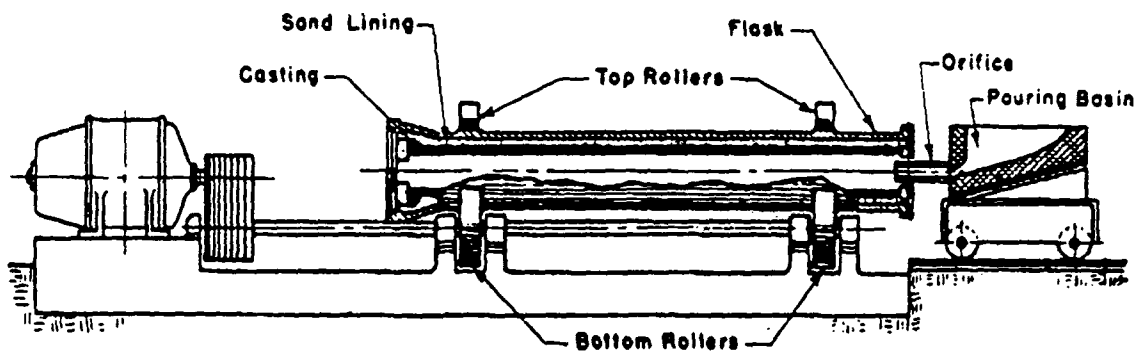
True Centrifugal Machine for Long-Tube Casting
